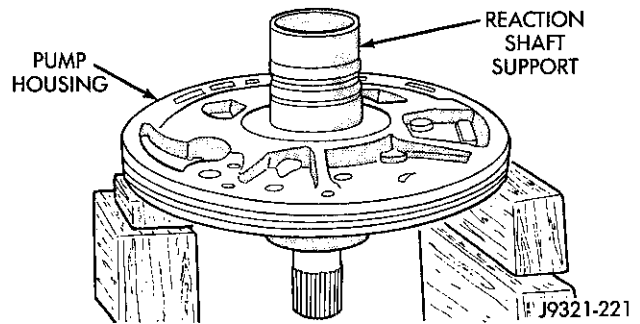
Assembling Reaction Shaft Support And Pump Housing
